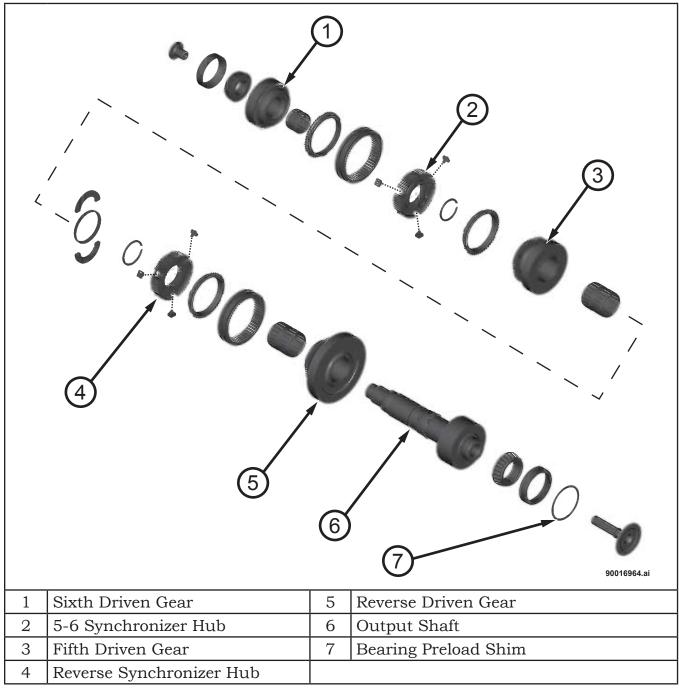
DMT6 5-6-R Output Shaft Exploded View
